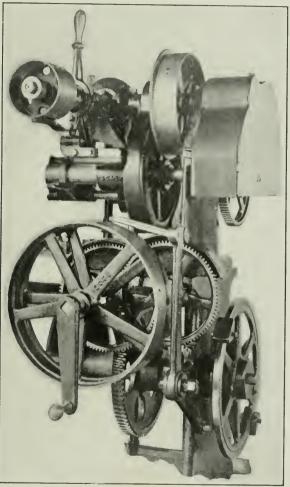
Mechanism for Operating Cam Shaft of Universal Automatic Screw Machine
